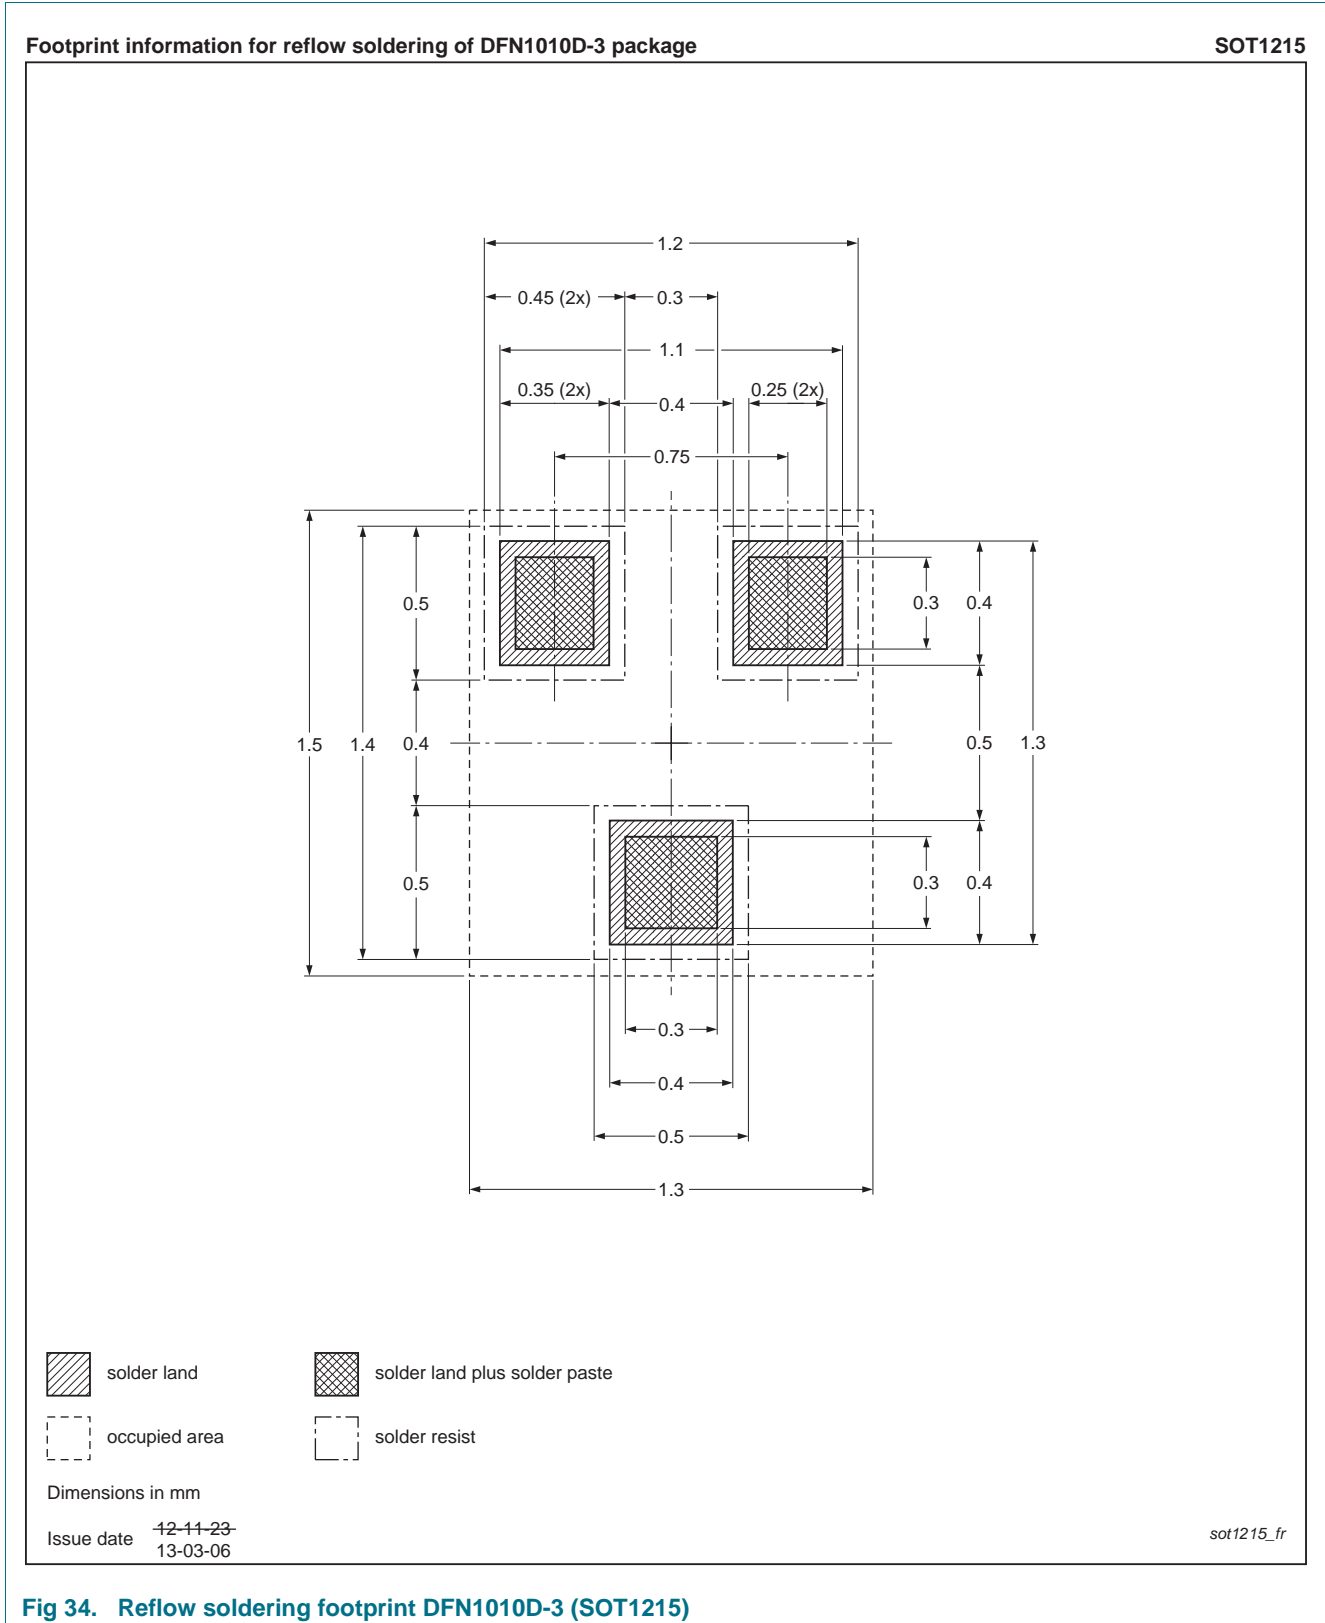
Reflow soldering footprint DFN1010D-3 (SOT1215)
